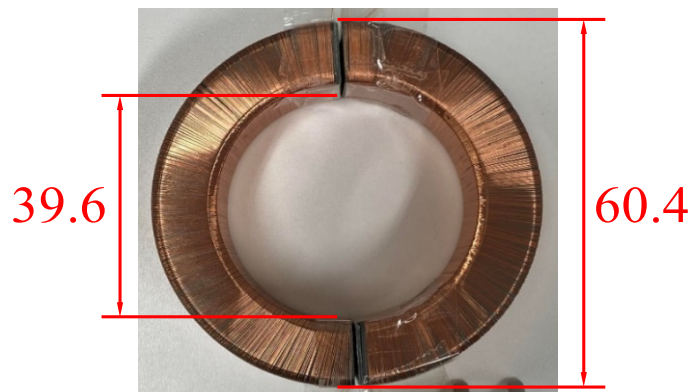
Ring-shaped solenoid coil constructed with a fabricated ferrite core (Unit : mm)
